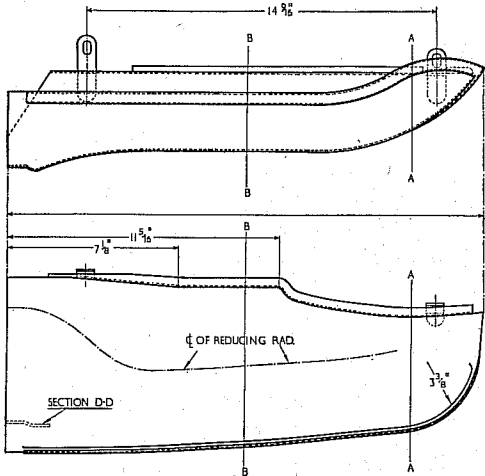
(left).—Dimensioned drawing of leg shield (22-gauge deep-drawing steel)
